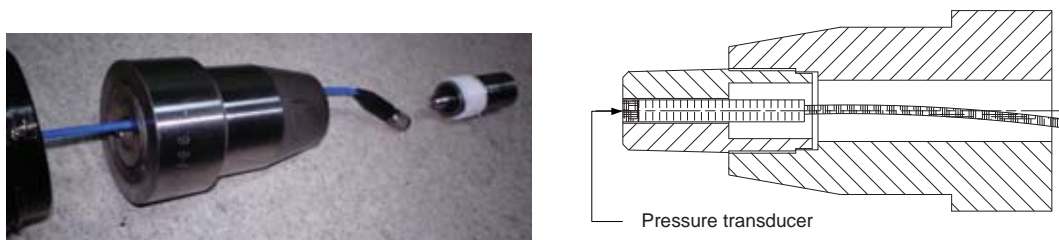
The injector nozzle equipped with piezoelectric pressure transducer
